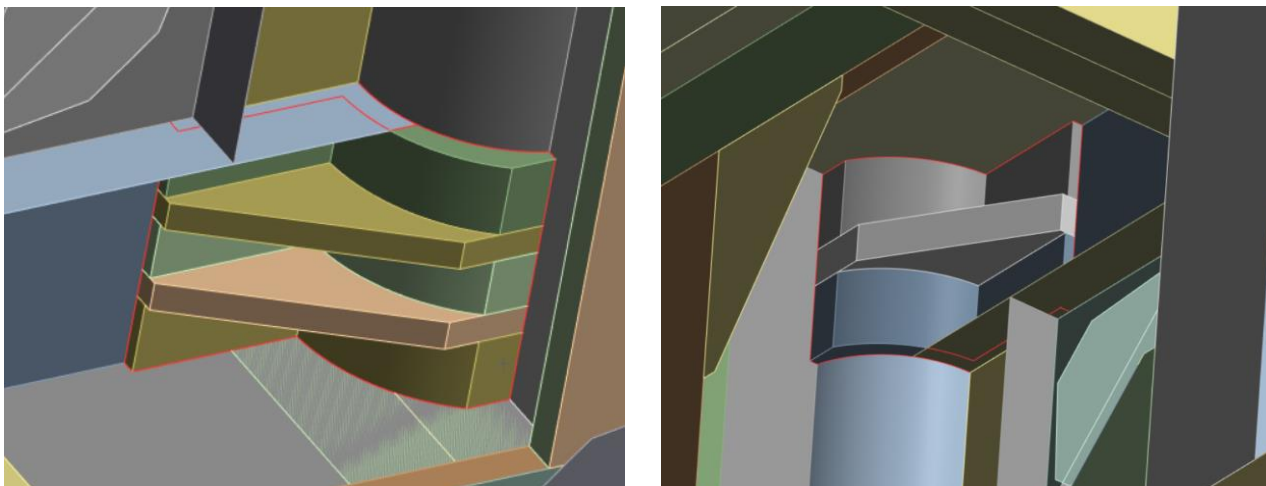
Heat flow parameters. Picture 81: The welded edges are shown in red.
